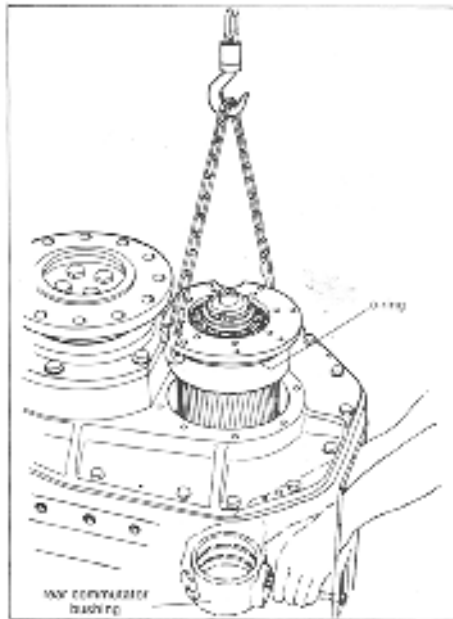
Removing (or Installing) Pinion Shaft Assembly.
